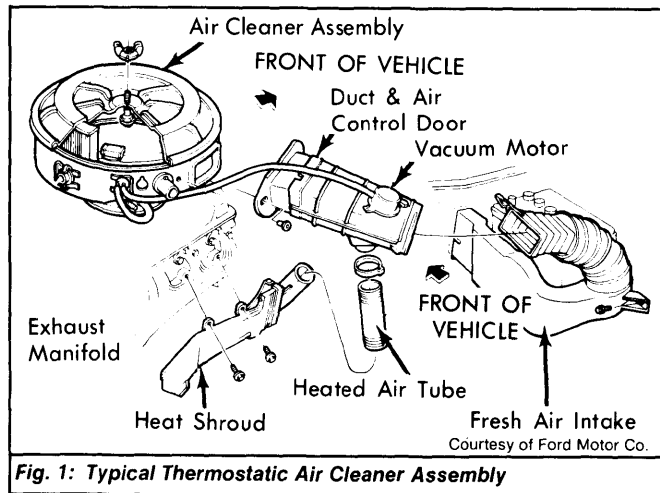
Typical Thermostatic Air Cleaner Assembly
